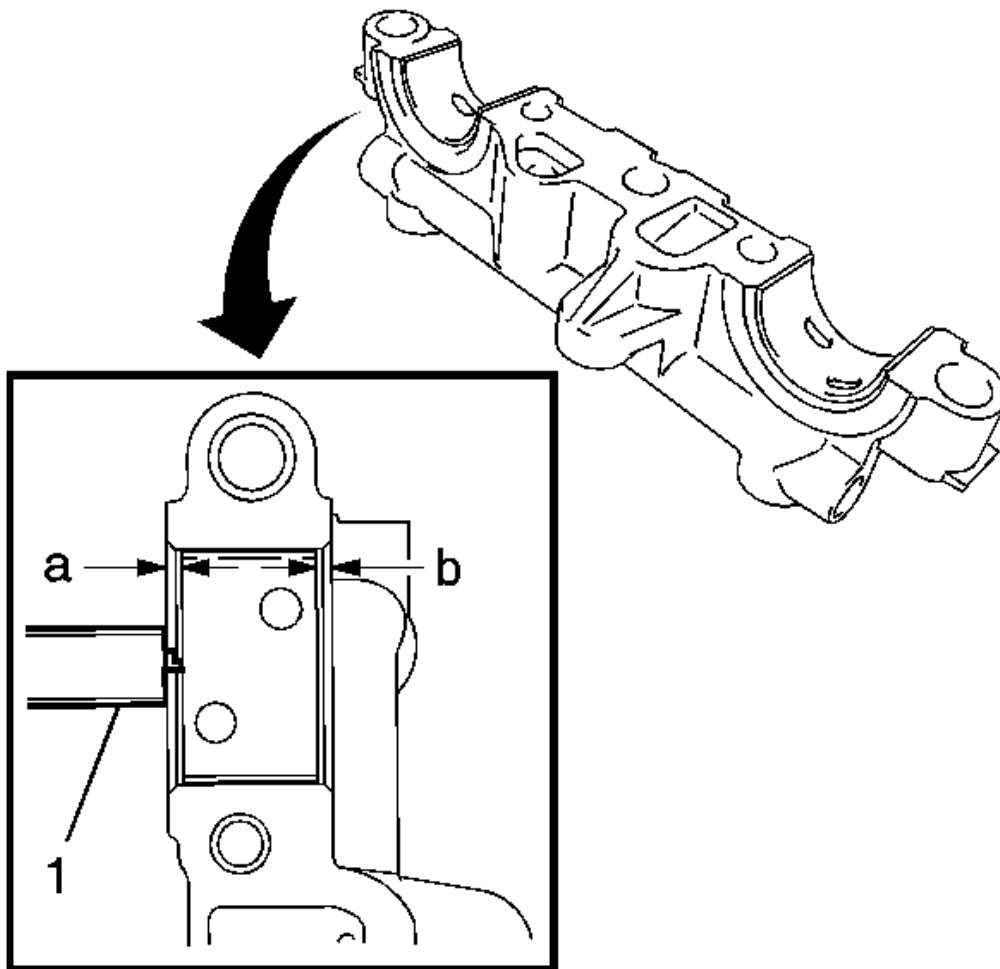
Measuring Distance Between Bearing Cap Edge & Camshaft Bearing Edge
